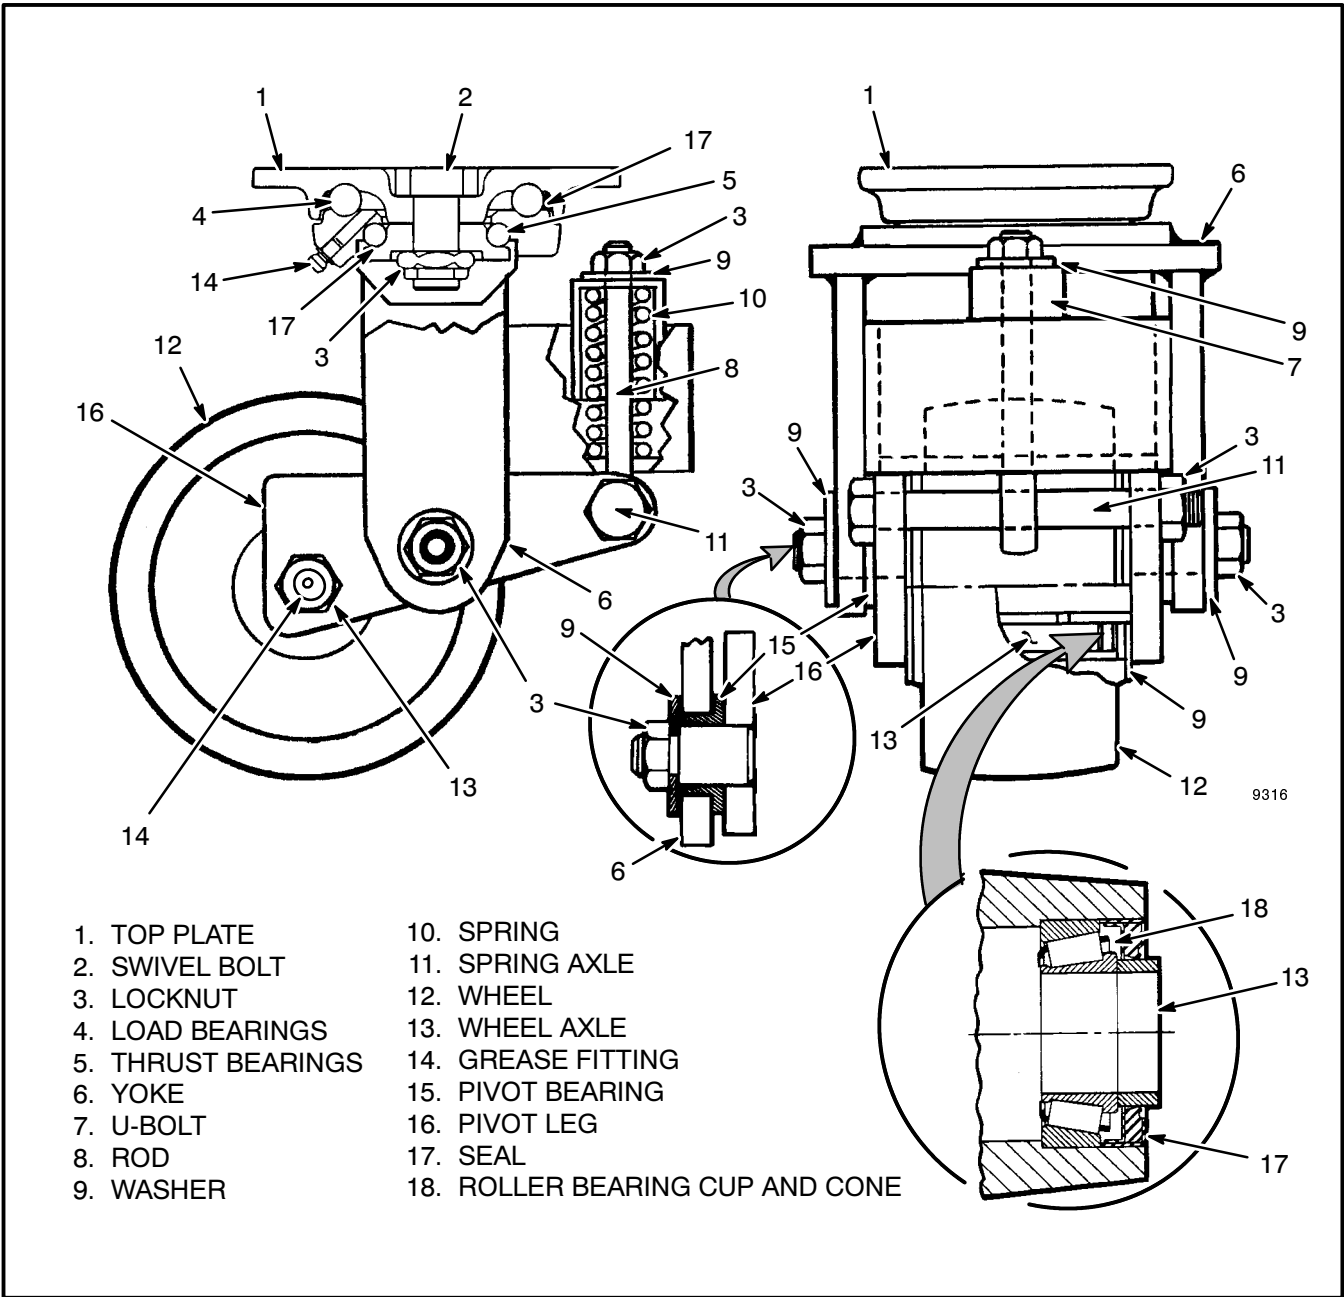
OPTIONAL CASTERS – B40-60XL, B40CL
